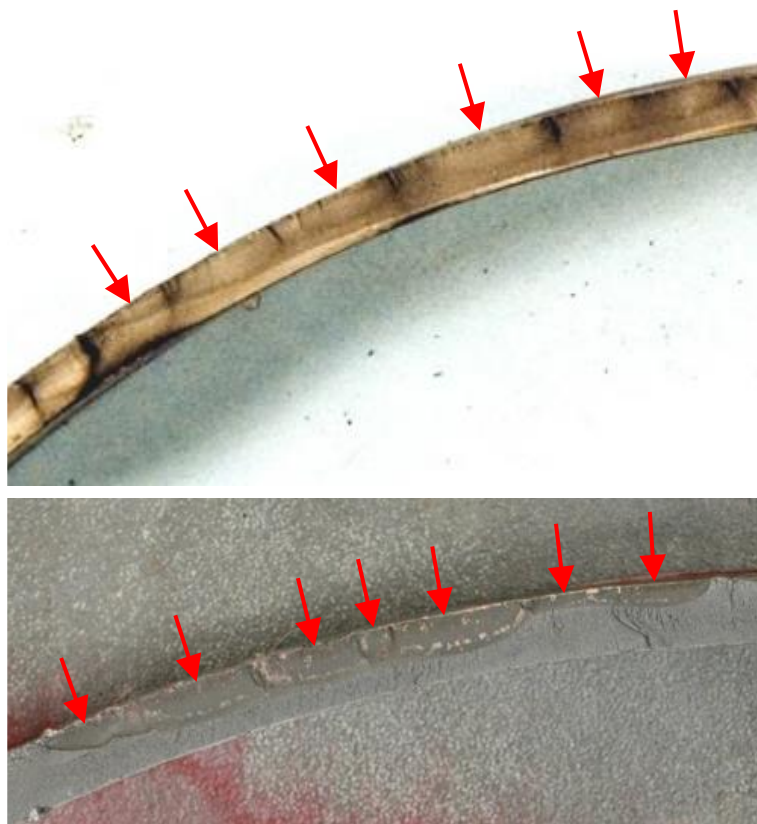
Multiple crack propagation and coalescence in actual fracture surfaces
